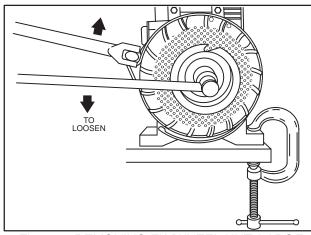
REMOVING FLYWHEEL NUT, LARGE FLYWHEELS
